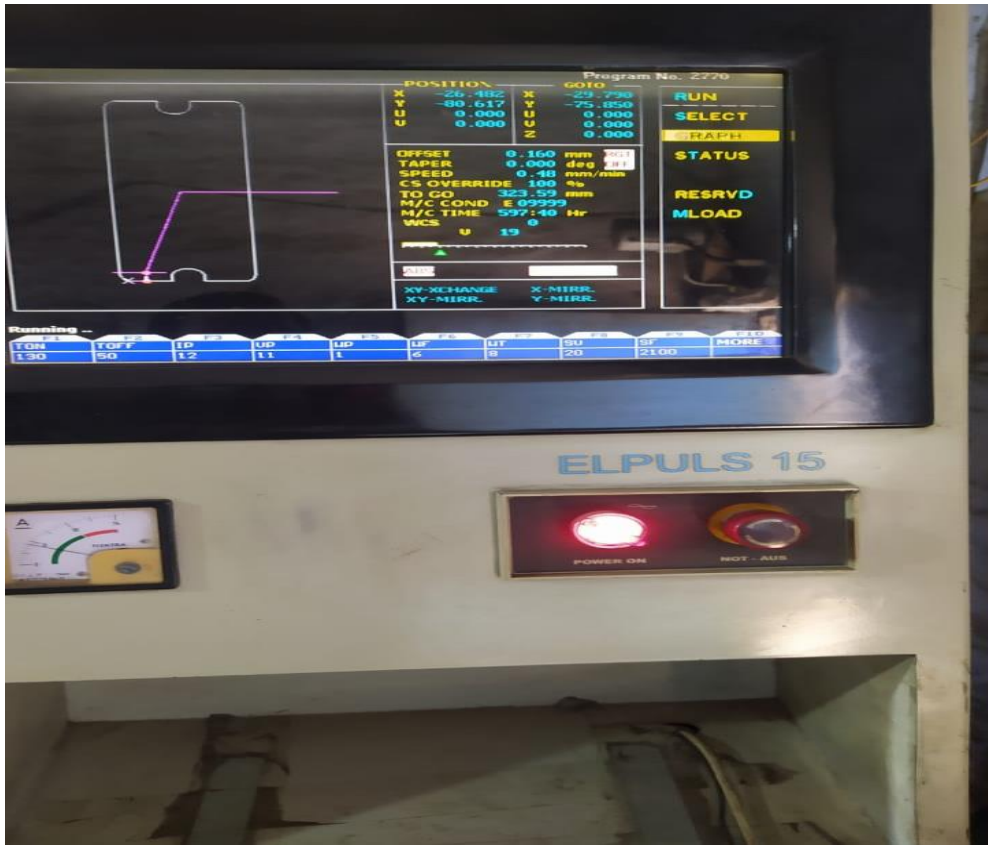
Control Panel CNC EDM wire cutting Machine
